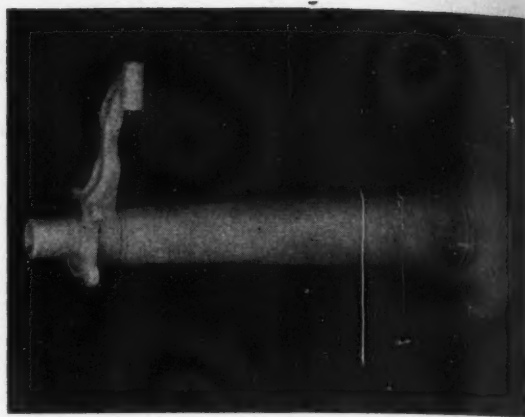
Fabricated axle housing for passenger car incorporates cast hub and spring perch
